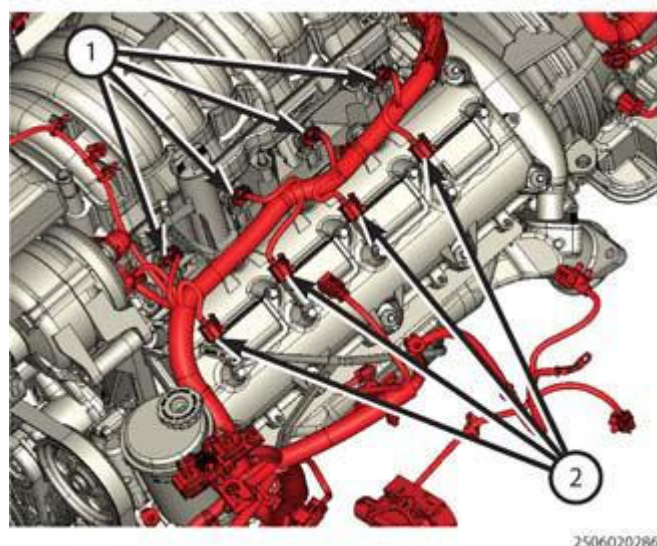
Injectors Harness Connectors & Ignition Coil Harness Connectors
